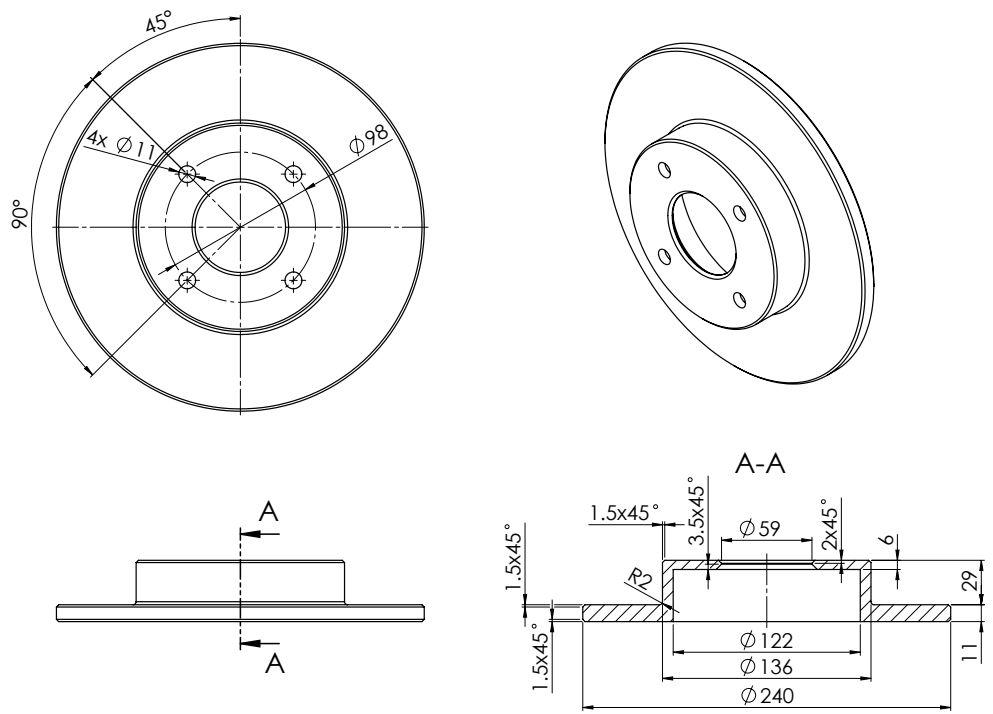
Drawing of the Fiat Punto disc showing the nominal dimensions.
